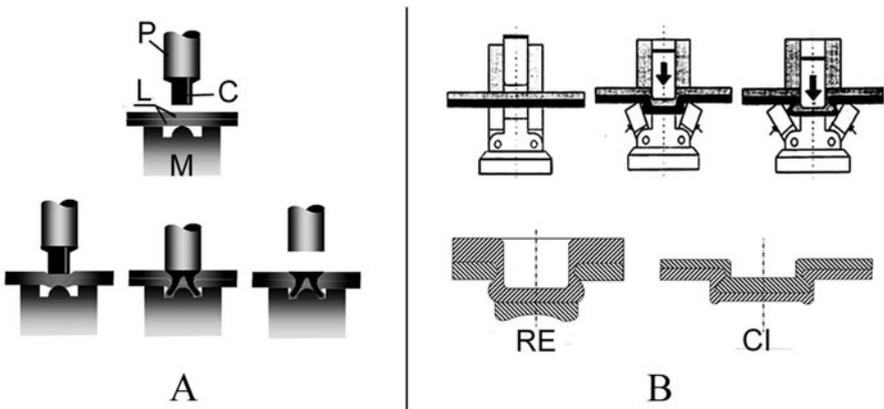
A) Blind rivets fastening; P: punch; M: crank; C: rivet; L: sheets. B) Clinching with punch penetration and permanent deformation of sheets; CI: cylindrical; RE: rectangular.
